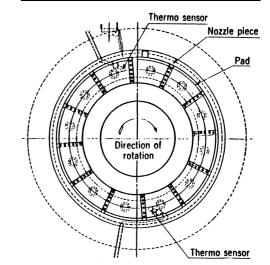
Direct Lubrication Type Bearing (97/8 in) Tested.
